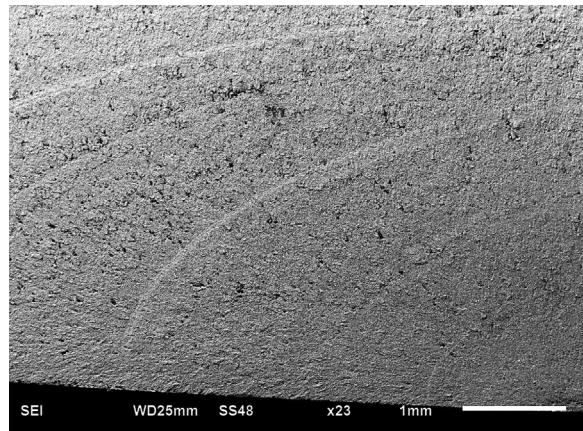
The magnified part of area shown and marked in [Fig. 5](#). Fatigue fracture with origin and beach marks. Scanning electron microscopy.
